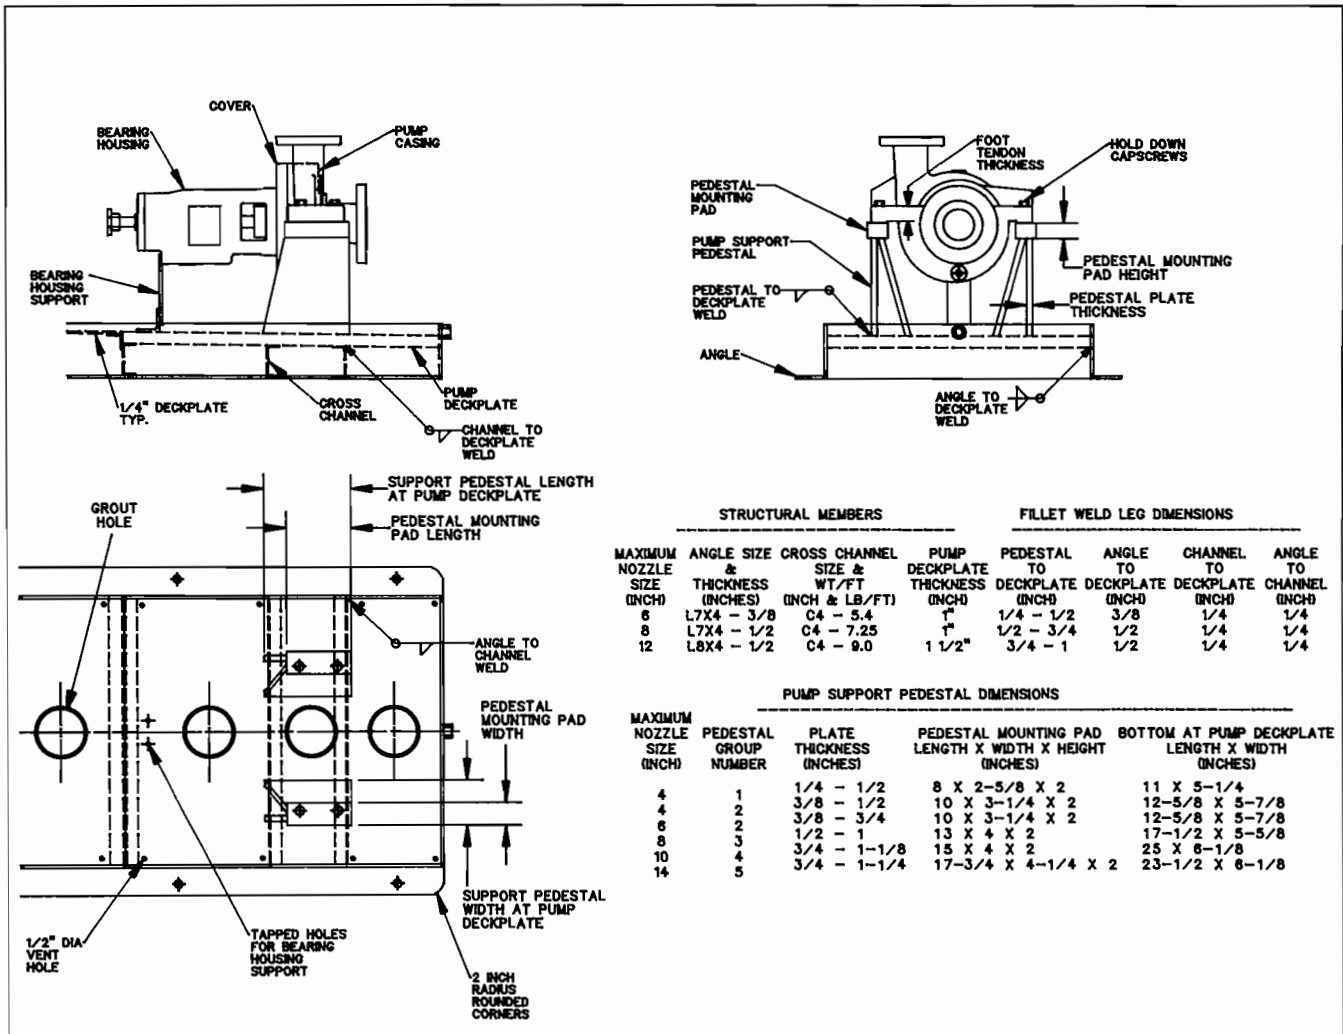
Typical Baseplate Construction for the Three Pump-Baseplate Assembly Parameters Shown in Figure 19.
